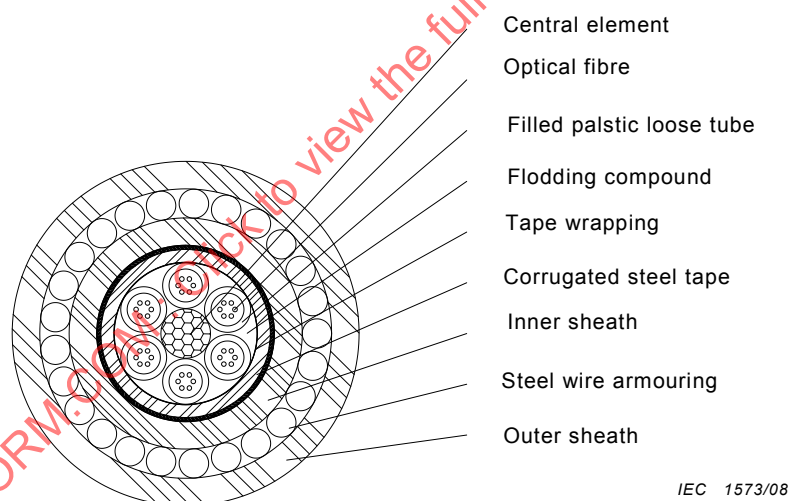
Optical fibre sewer cable for direct installation – steel wire armouring
